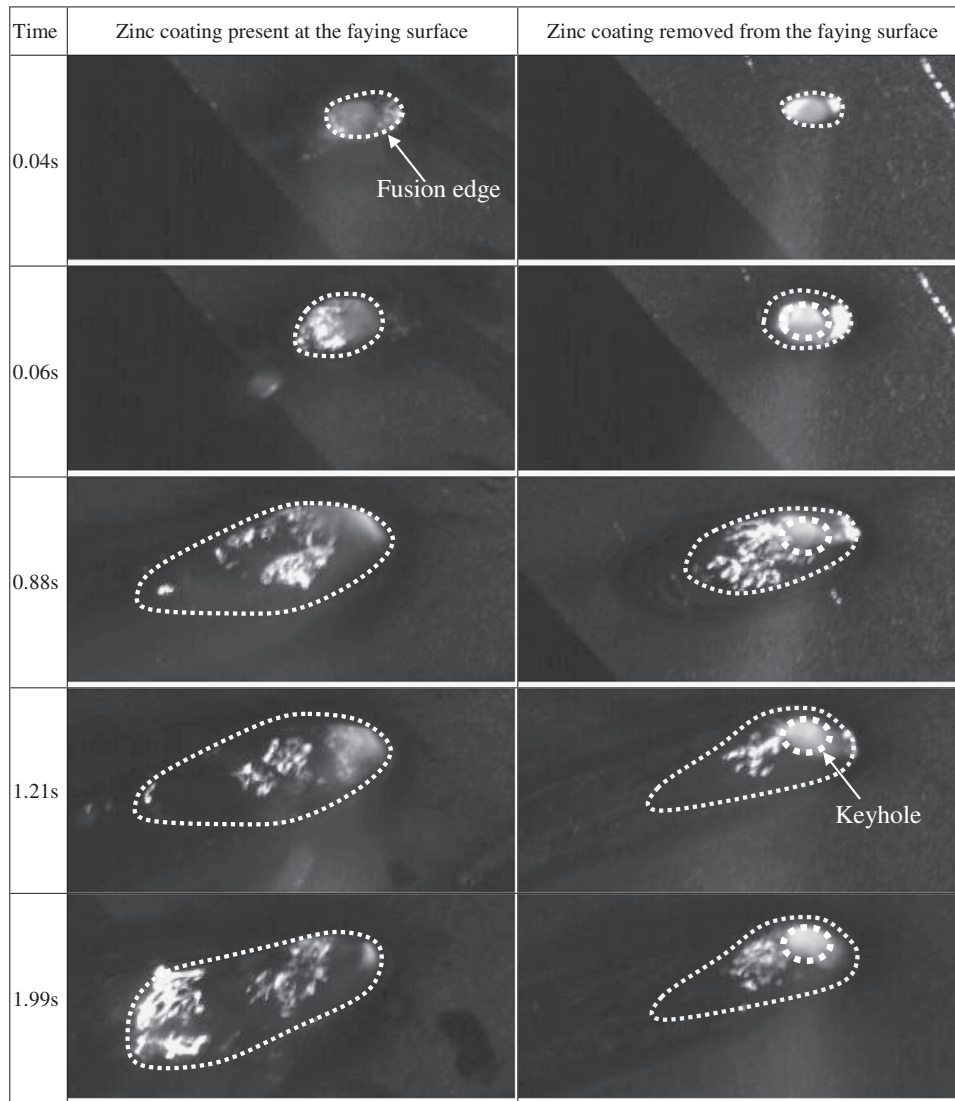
Molten pool images captured by high speed CCD with green laser from the initialization of weld pool until the stable weld pool is achieved (Laser power is set at 2.5 kW, welding speed is set at 30 mm/s, an overlap joint configuration is chosen).
